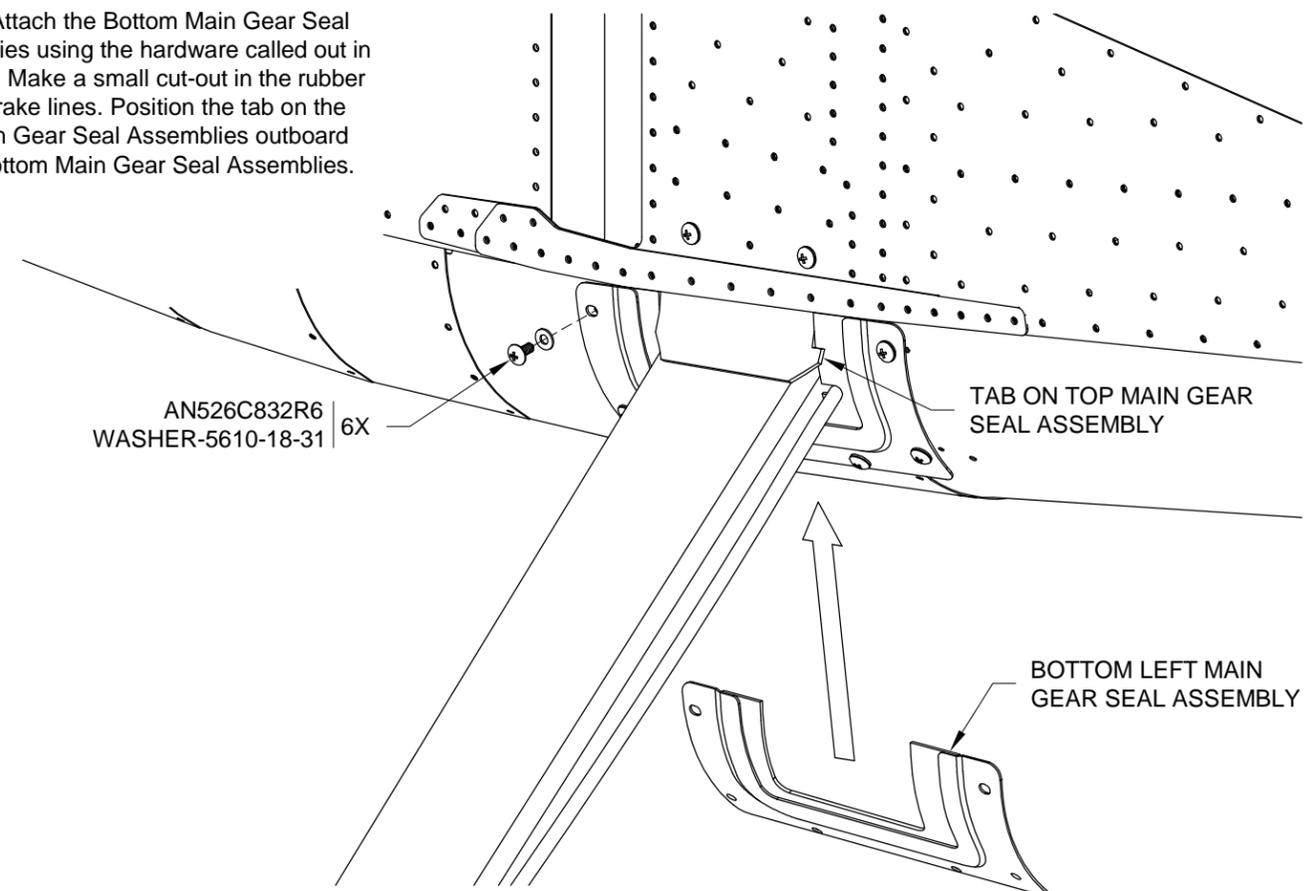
ATTACHING THE BOTTOM MAIN GEAR SEAL ASSEMBLIES
